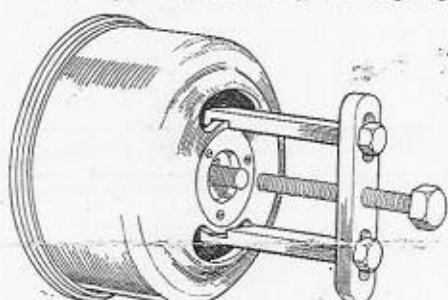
TOOL FOR REMOVING IGNITION FLYWHEEL: The legs pass through slots in the wheel.
